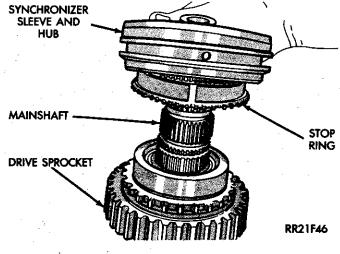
Removing/Installing Synchronizer Sleeve, Hub And Stop Ring
